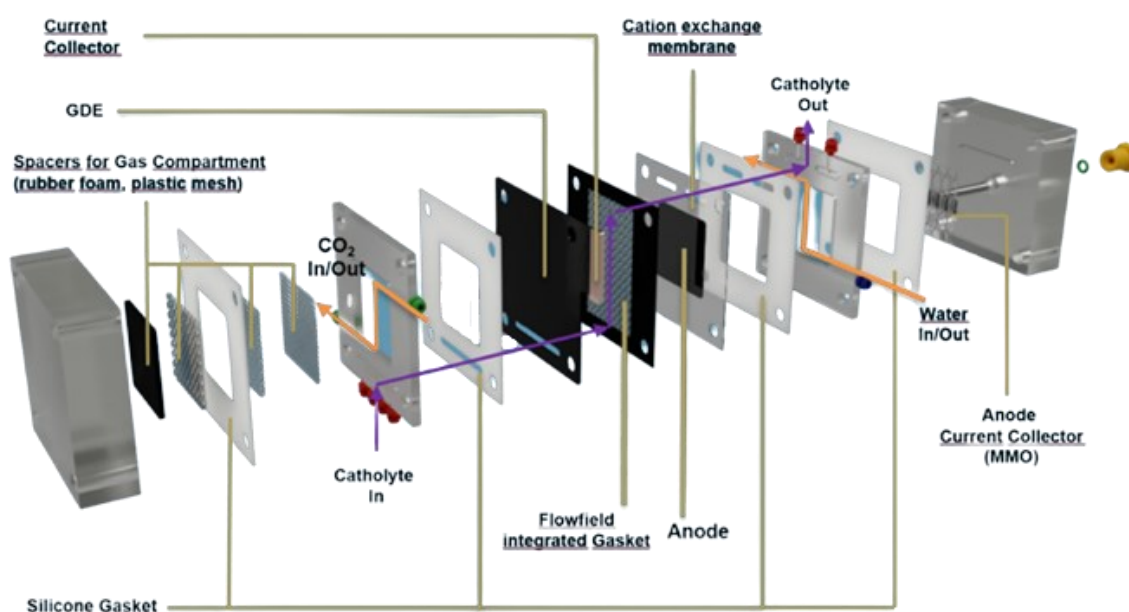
Exploded-view drawing of 25 cm² electrolyser cell (image received from Marvin Obkopp).
